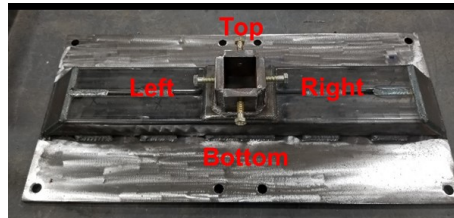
Axial drop tower fixture. The screws were used to adjust for various samples sizes. The fixture gripped the bottom 50 mm of the sample
